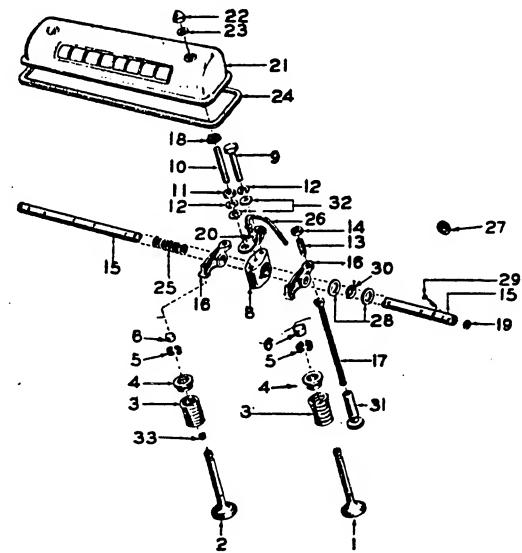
VALVES, PUSH RODS, ROCKER ARM COVER AND RELATED PARTS GROUP
